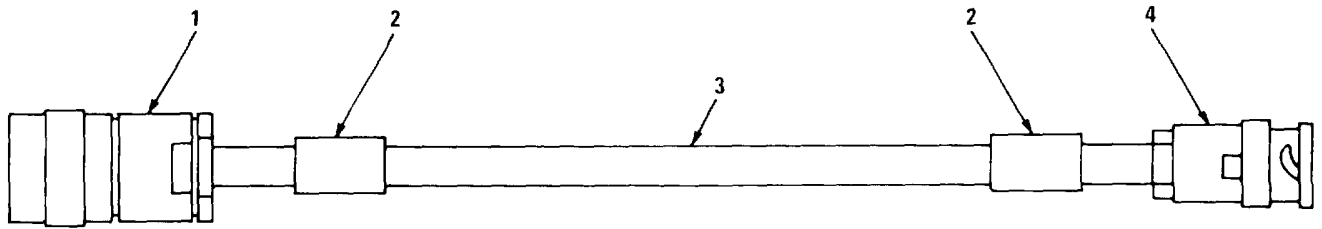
Cable Assembly, Matrix Receiver Link (0283-4-4847-3)
